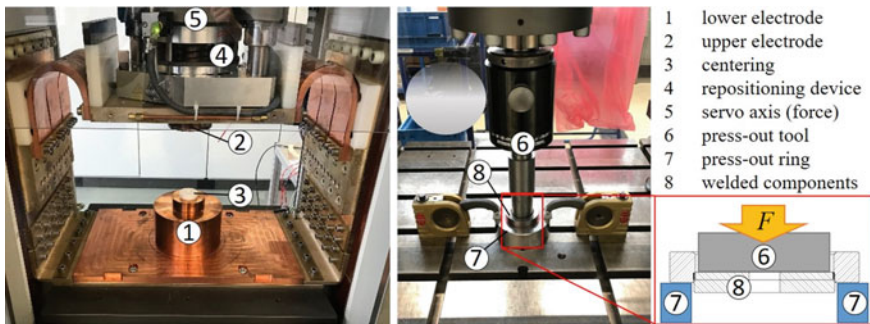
Portal welding machine used (left) and setup of the quasi-static press-out test (right)
